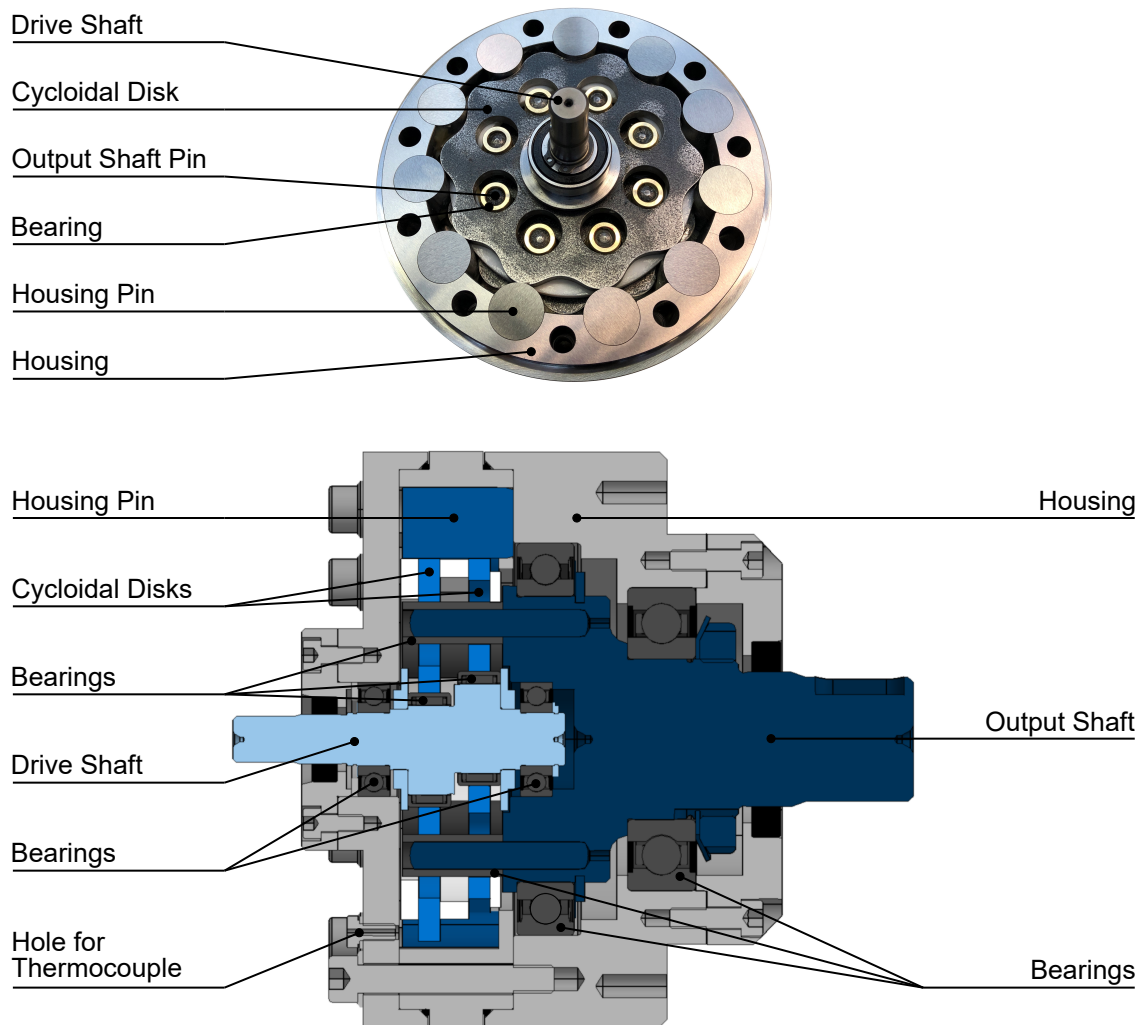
Cycloidal drive used for the endurance investigations with an open lid (top) and in a sectional view (bottom).
